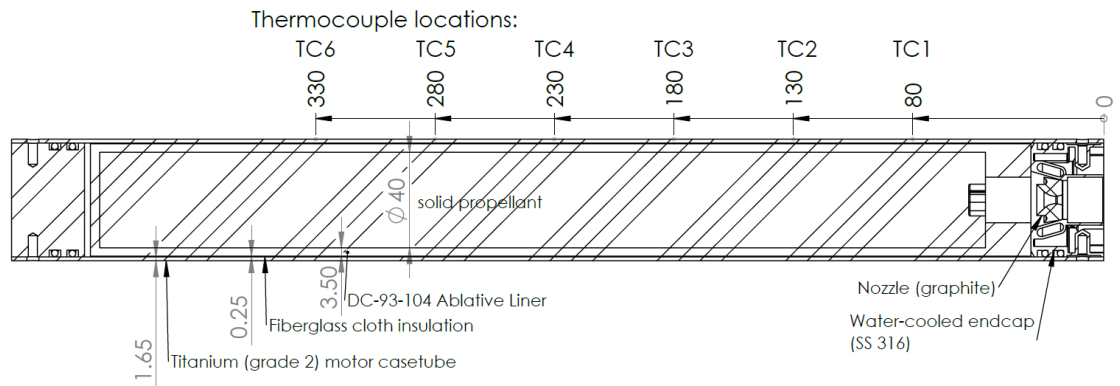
Six Type K thermocouples were mounted to the outside of the motor case. Dimensions in millimeters.
